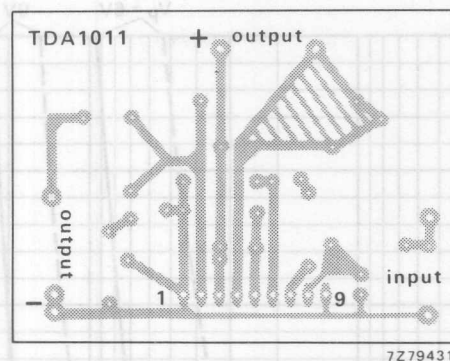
Track side of printed-circuit board used for the circuit of Fig. 4; p.c. board dimensions 62 mm x 48 mm.
